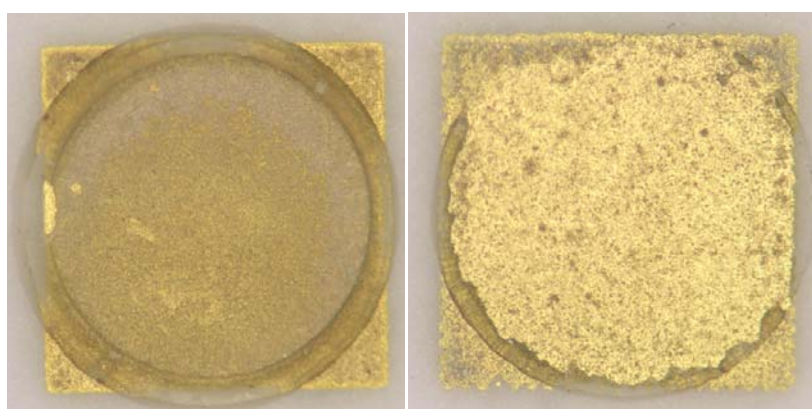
Metal Surface after 500 hours Aging at 320°C
